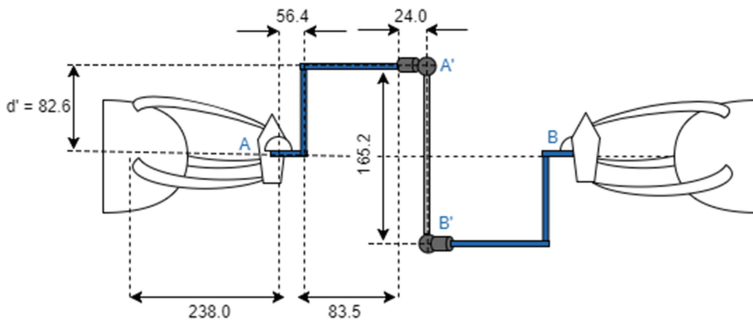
Dimensions of connector parts from side view (in millimeters)
